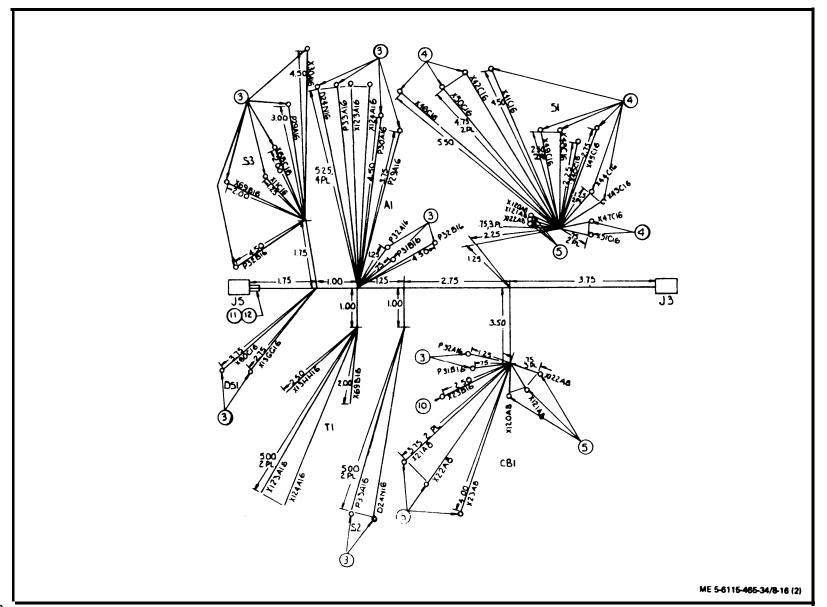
Control Box Assembly Branched Wiring Harness (Sheet 2 of 2) Drawing No. 72-2828
